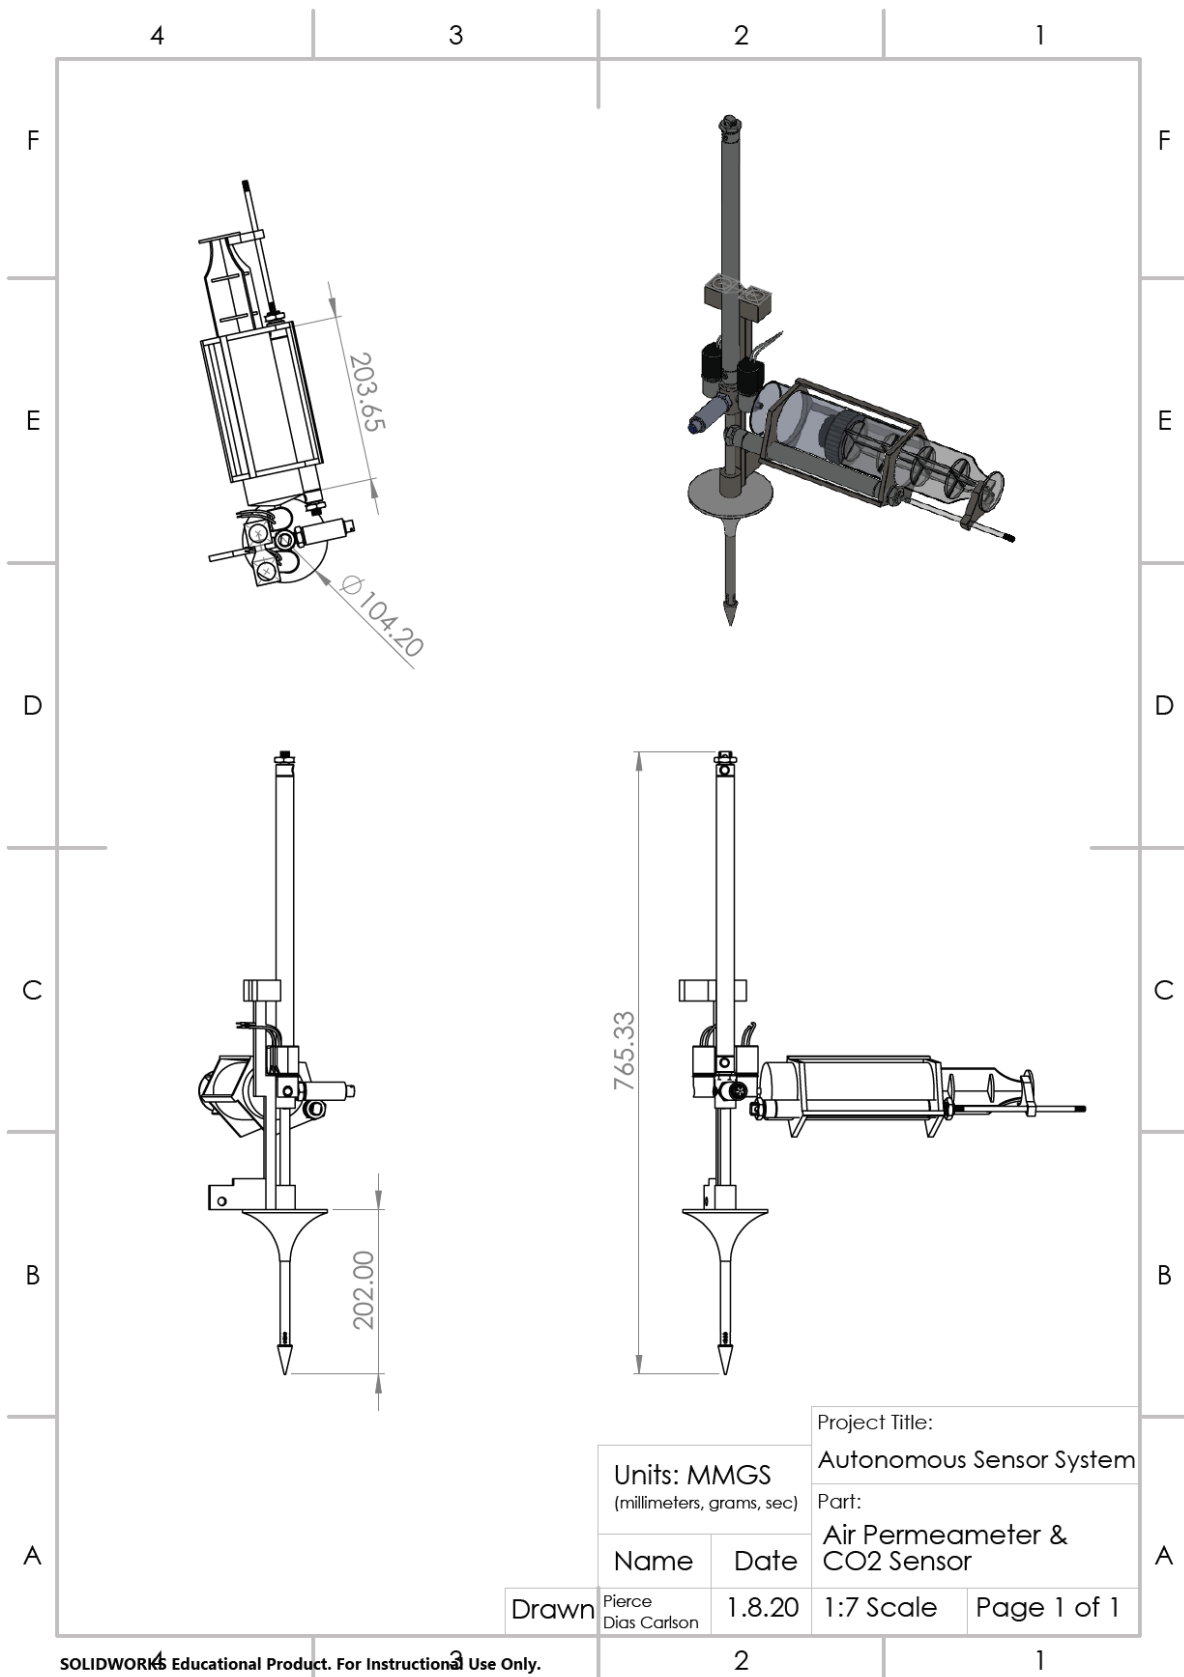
2D engineering drawing of air permeameter and CO2 sensor
